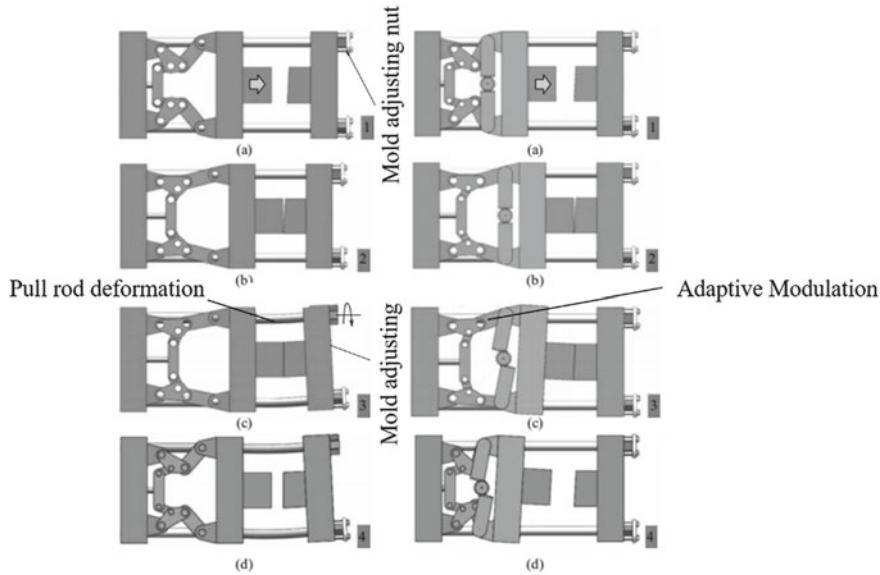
Comparison of mold adjustment between traditional three plates machine (left) and new three plates machine (right)
